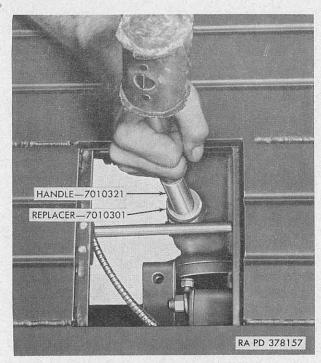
Installing front steering bellcrank bearing with replacer 7010301.
